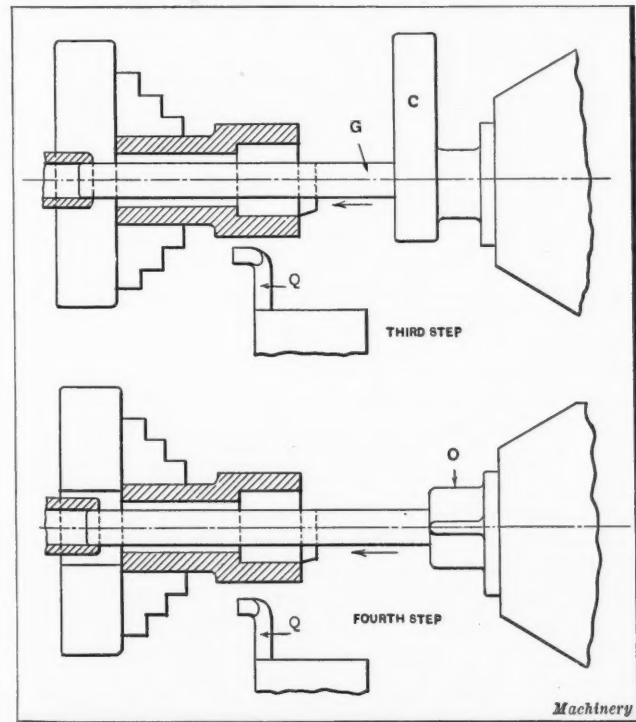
Rough- and finish-boring the Hole in the Large End of the Billet
